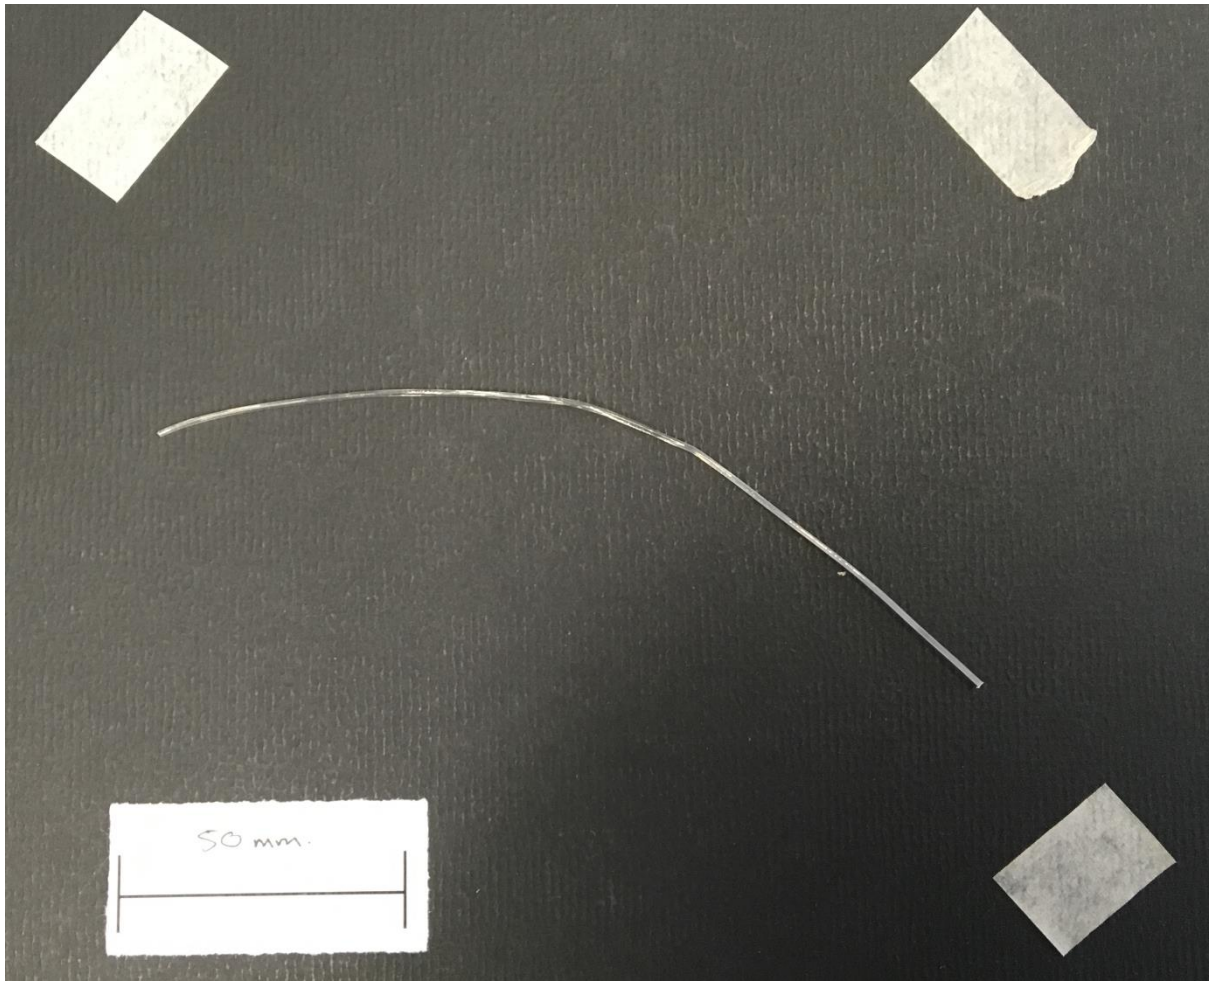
4 PLA 100WT% fibre. Produced using the 1 mm diameter single screw melt extruder.
